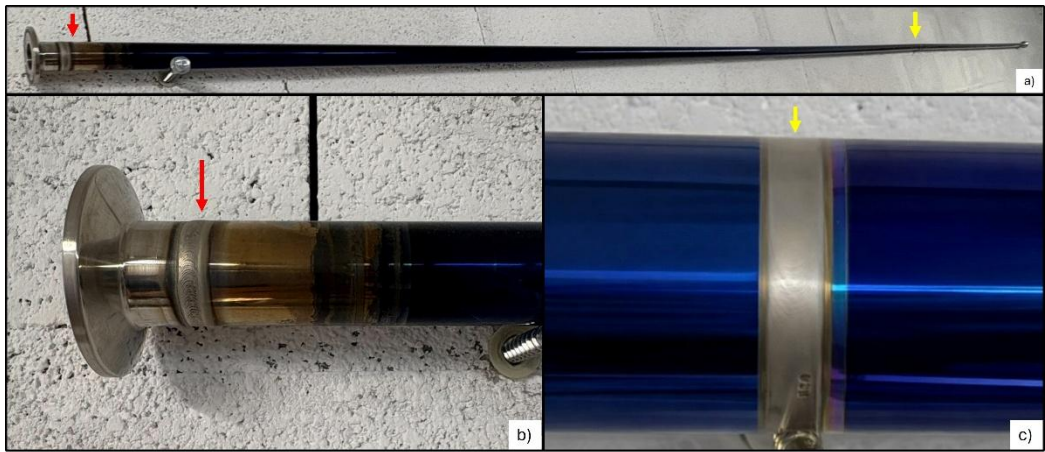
Two tubular receivers welded together to form a 6 meter long receiver, then assembled in the PTCs collectors. Details of flanges (b, red arrow) and the welding of the two tubes (c, yellow arrow).
